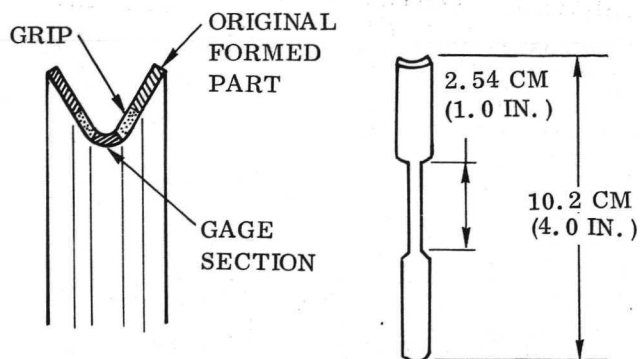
Specimen Configuration for Tensile Testing of Formed Parts
